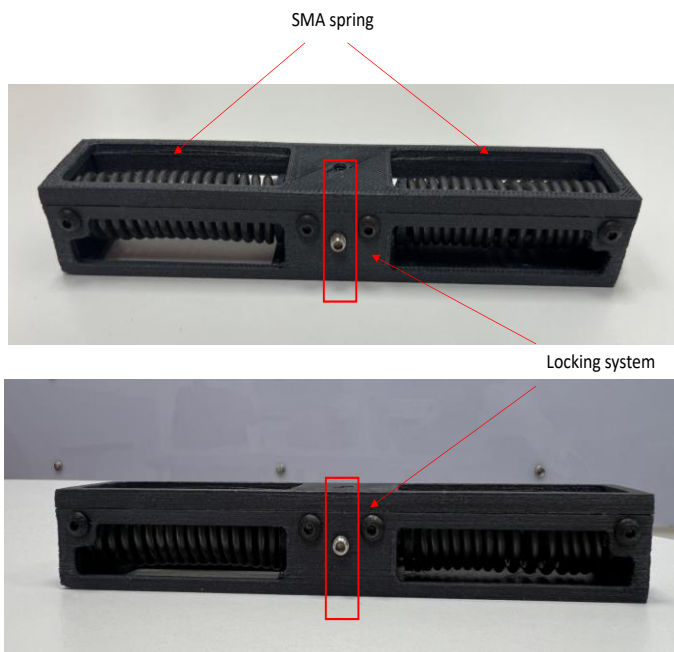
Actuator printed using additive technology with Carbon Peek material.
